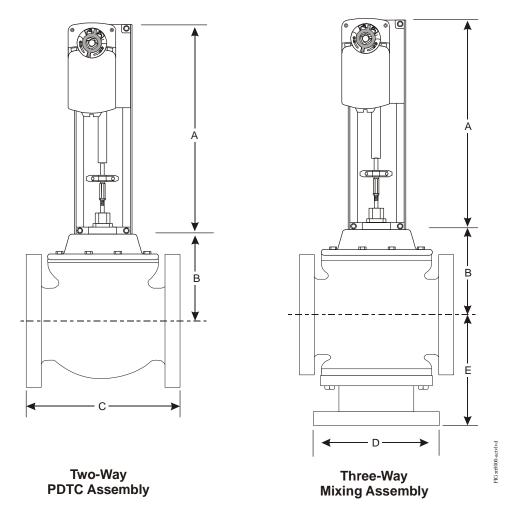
M9000 Actuated Valve Dimensions, in. (mm) (See Table 4.)
